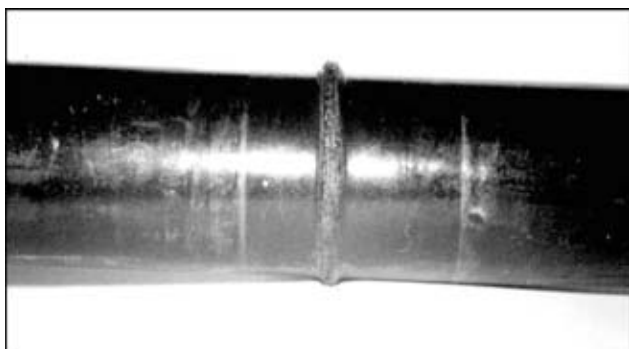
Welded joint of 76x16 pipe (time of welding is 104 s)
